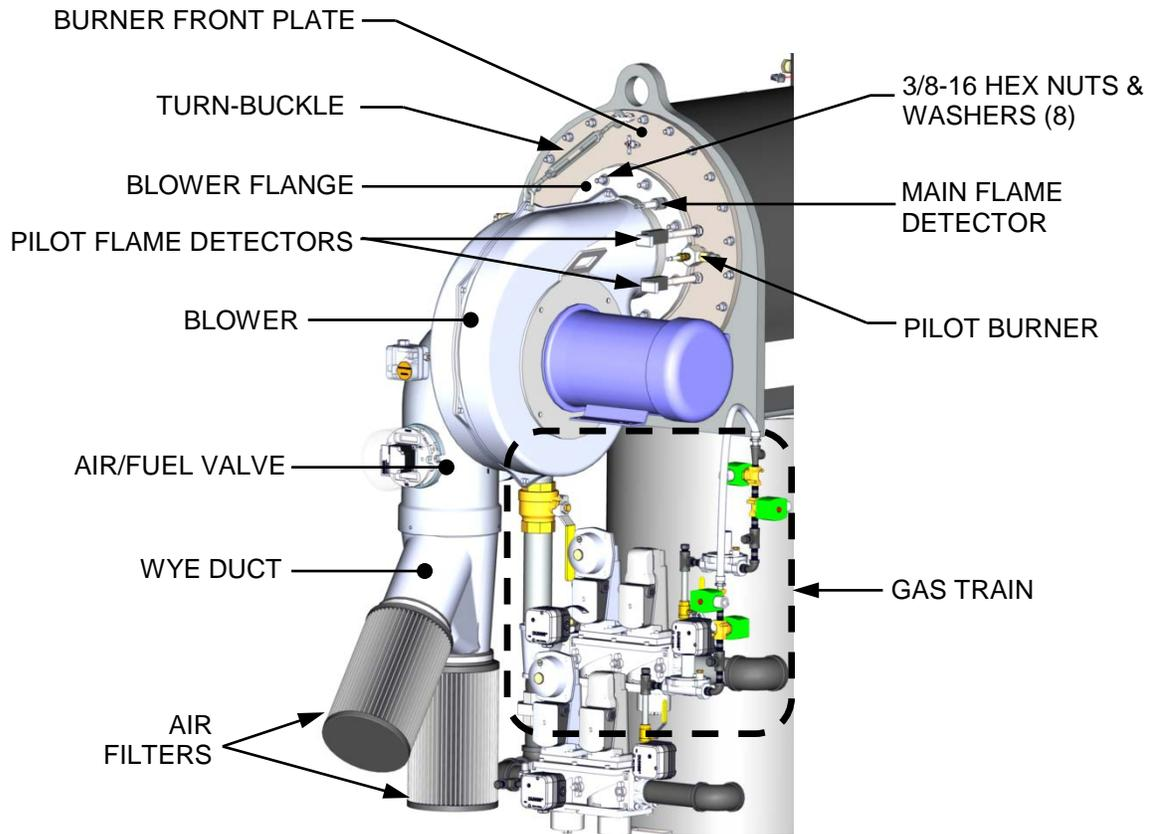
Burner Assembly Mounting Details – Right-Front View
